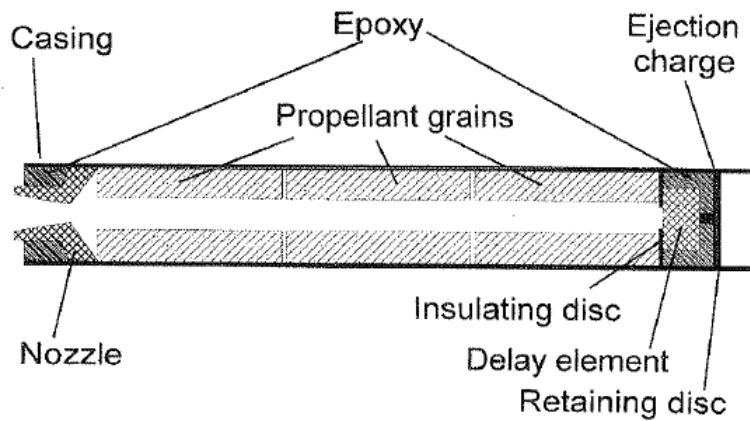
2D diagram of a solid rocket motor with the nozzle glued to the case with epoxy. Source: [4].
